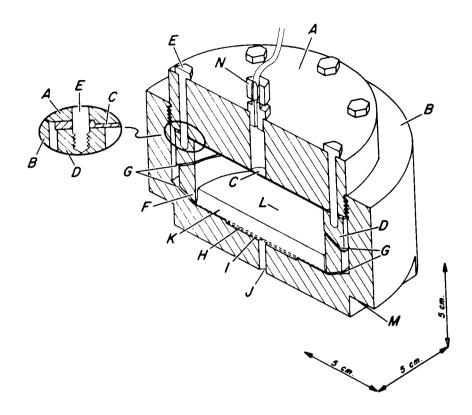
Gas-displacement squeezer for use with multisqueezer manifold. A = threaded squeezer top; B = squeezer bottom with inner taper (G); C = rubber membrane; D = sealing ring with tapered edge (G); E = nylon screw; F = inner ring with two tapered edges (G); G = sealing tapers; H = paper filter; I = Nucleopore membrane; J = exit hole; K = sediment sample; L = plastic covering on sediment; M = locking notch for tightening top.
